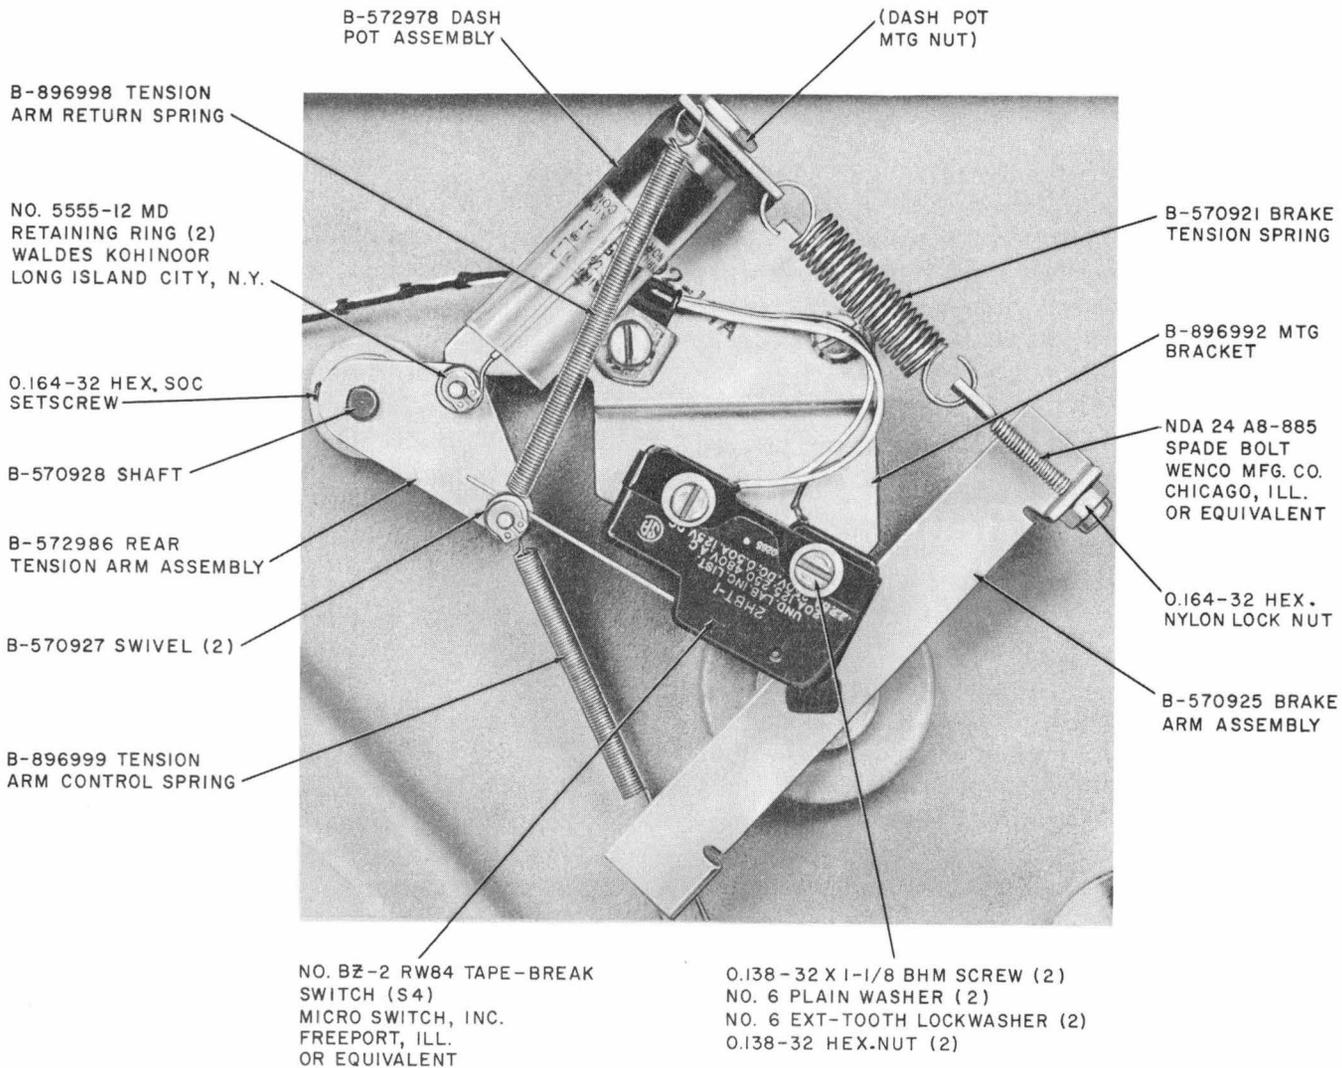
Supply Reel Brake and Tension Arm Assembly — KS-19125, List 2 Recorder
